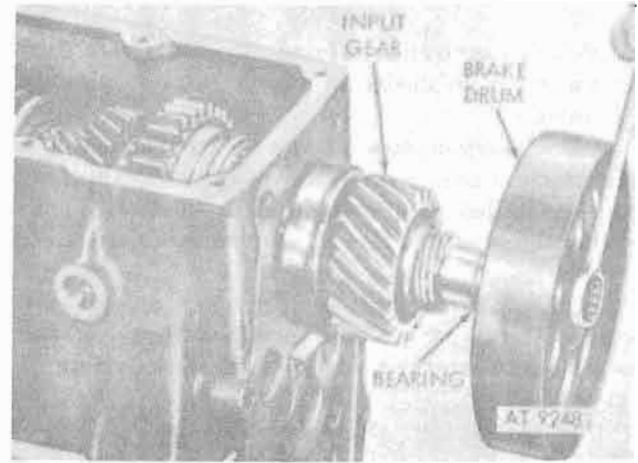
Pressing input gear, speedometer gear and bearing race on input shaft.
